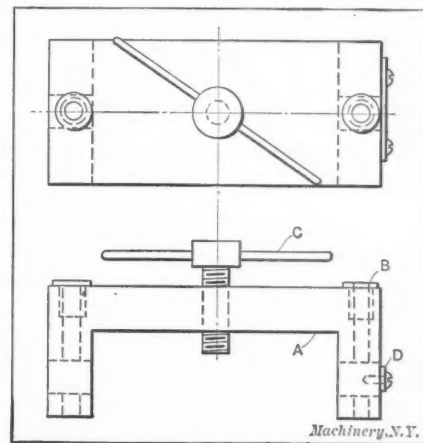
Simple Form of Jig for Drilling Two Holes in Shaft Ends
